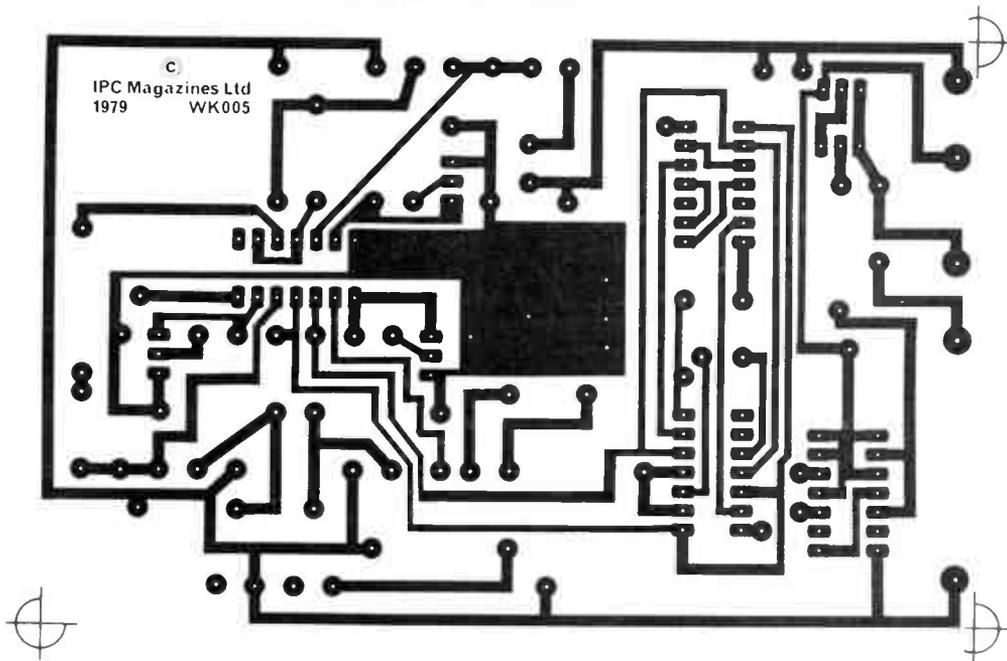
The copper track pattern and component placement drawing for Board 2 shown full size.
